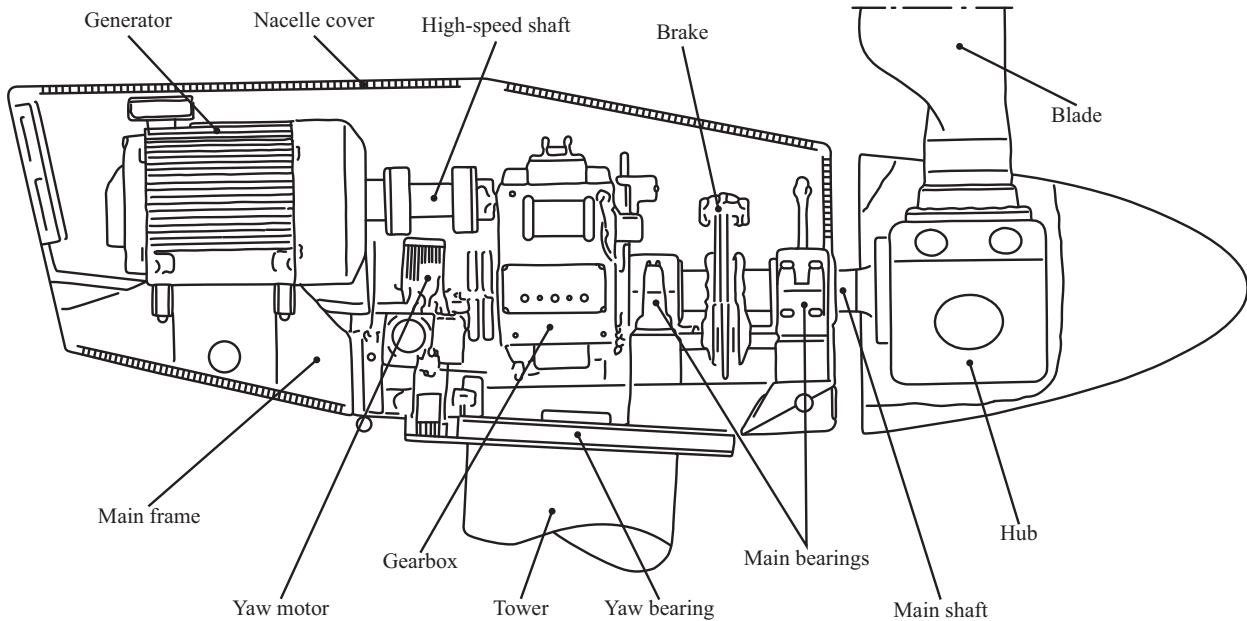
Components within a nacelle. This particular nacelle have a gearbox and use gear motors and a pinion-gear rim connection to control the yaw of the wind turbine. [28]
